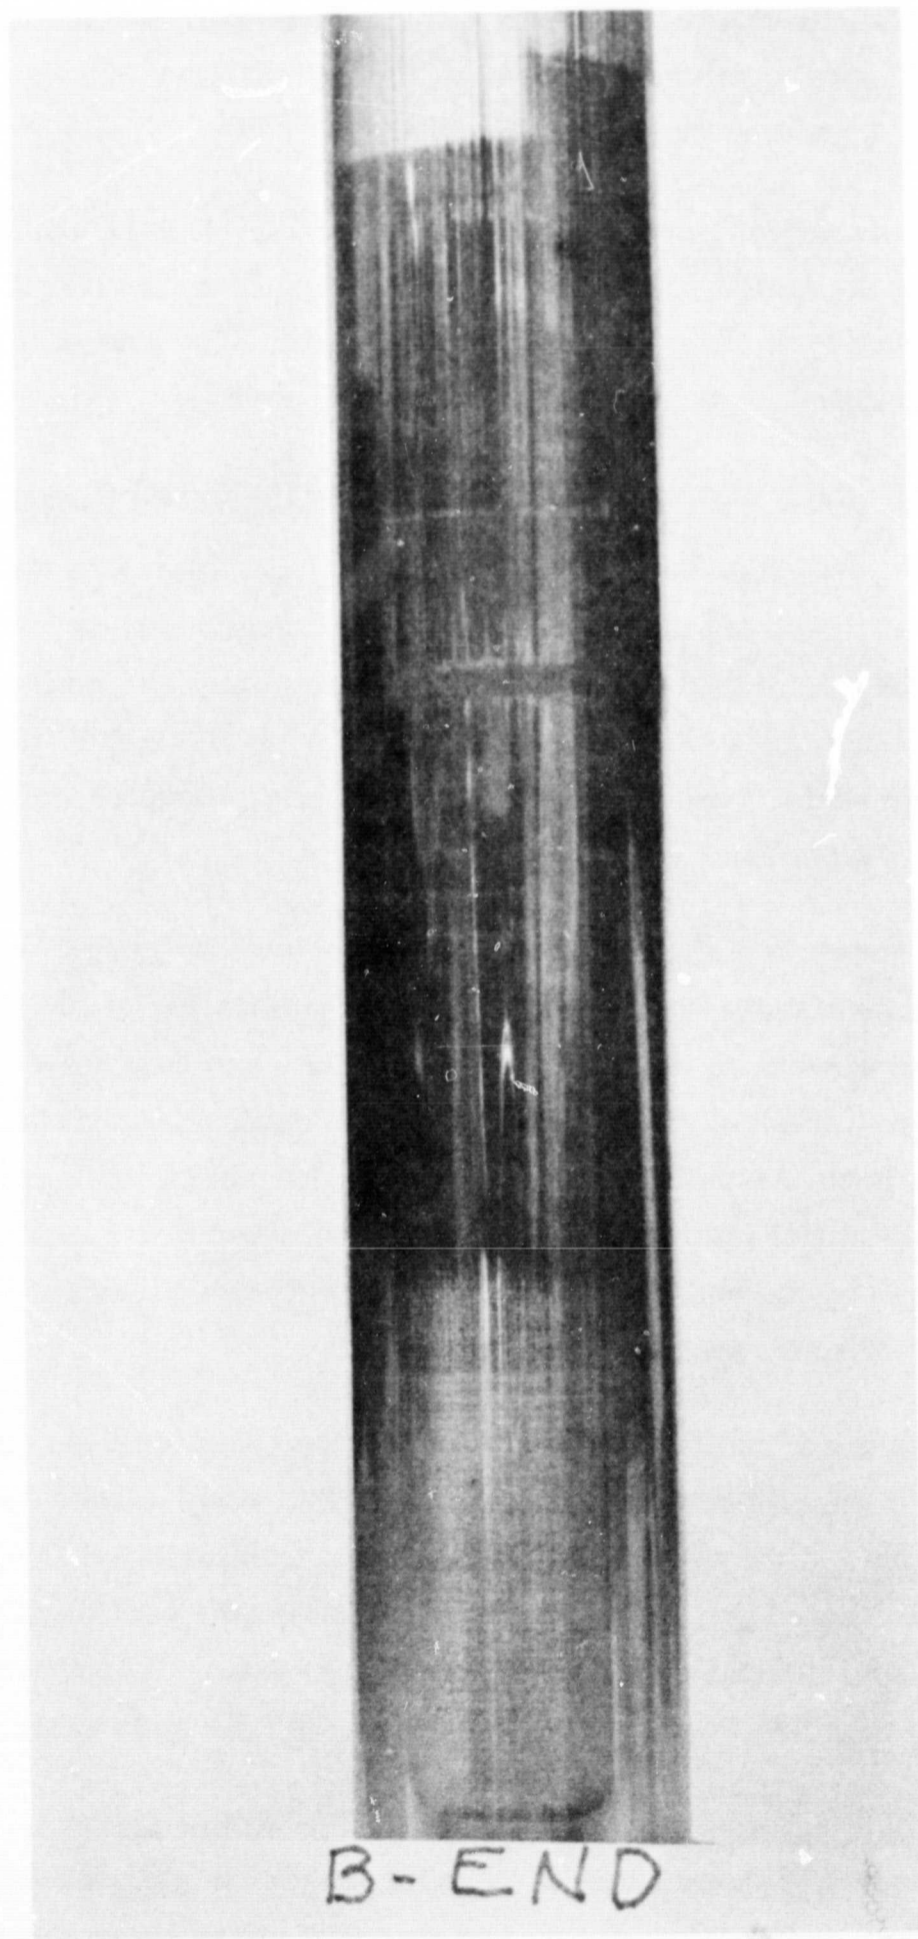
Piston Rod, B-End, One-Inch Reed Seal
